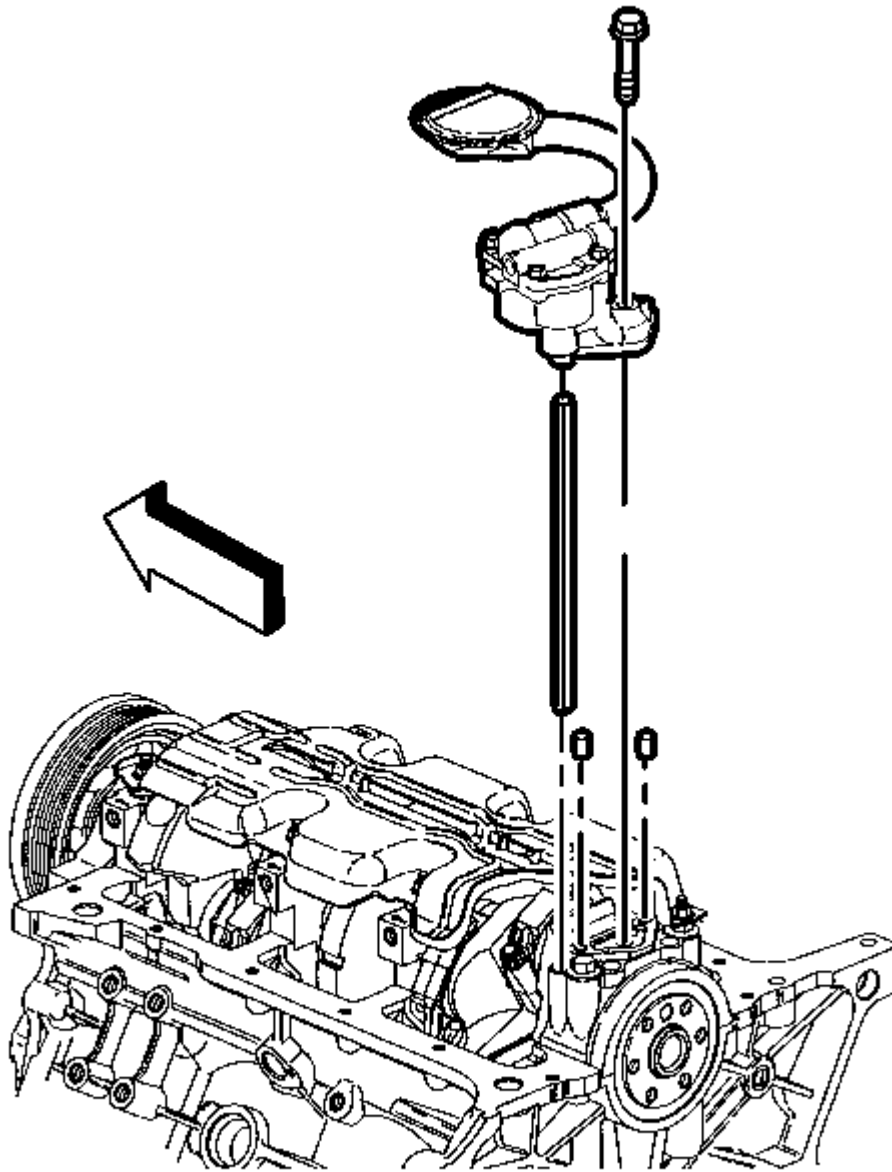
View Of Oil Pump & Oil Pump Drive Shaft
